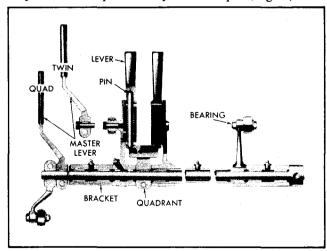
Throttle Control Cross Shaft Assembly - Twin and Quad Units
